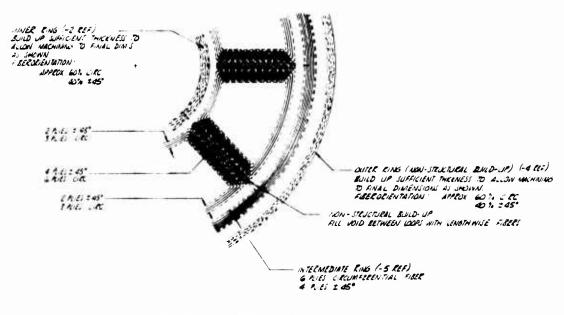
Base Disc Assembly - Helicopter Transmission Housing (WRD Drawing No. 4692).
